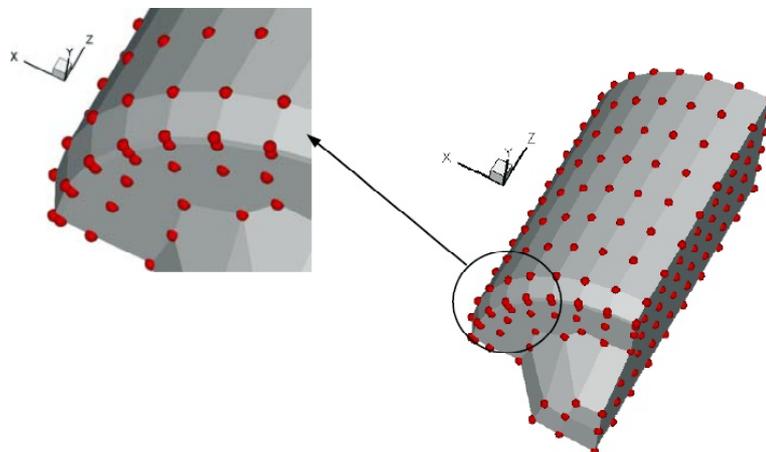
The shape of extrusion part after modifying positions of the contact points used the method presented in the paper when the stroke is 6 mm.
